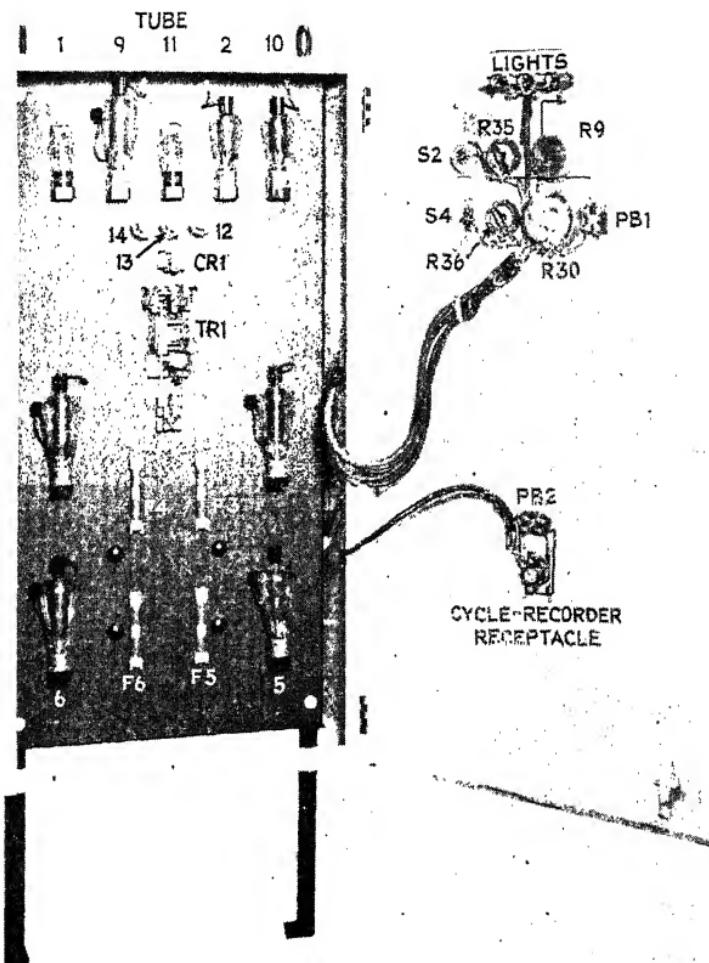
A.—All-tube spot-, pulsation- and seam-welding control (CR7503-C107).
